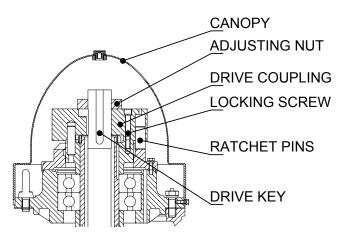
COUPLING ASSEMBLY DRAWING
